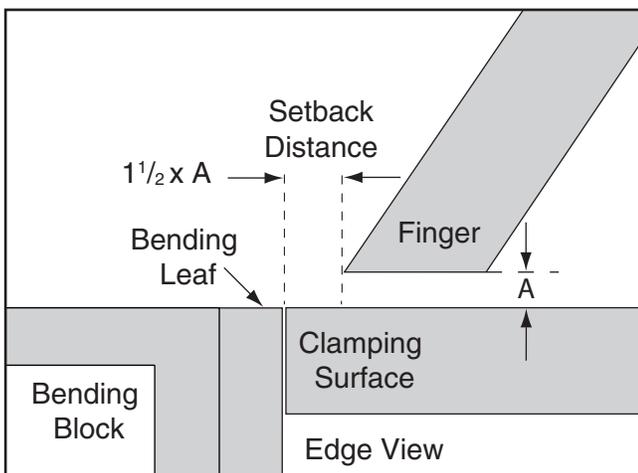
Determining setback distance for workpieces 22 gauge and thinner.
